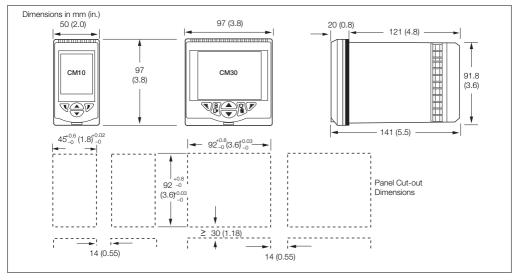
ControlMaster CM10 and CM30 Dimensions
